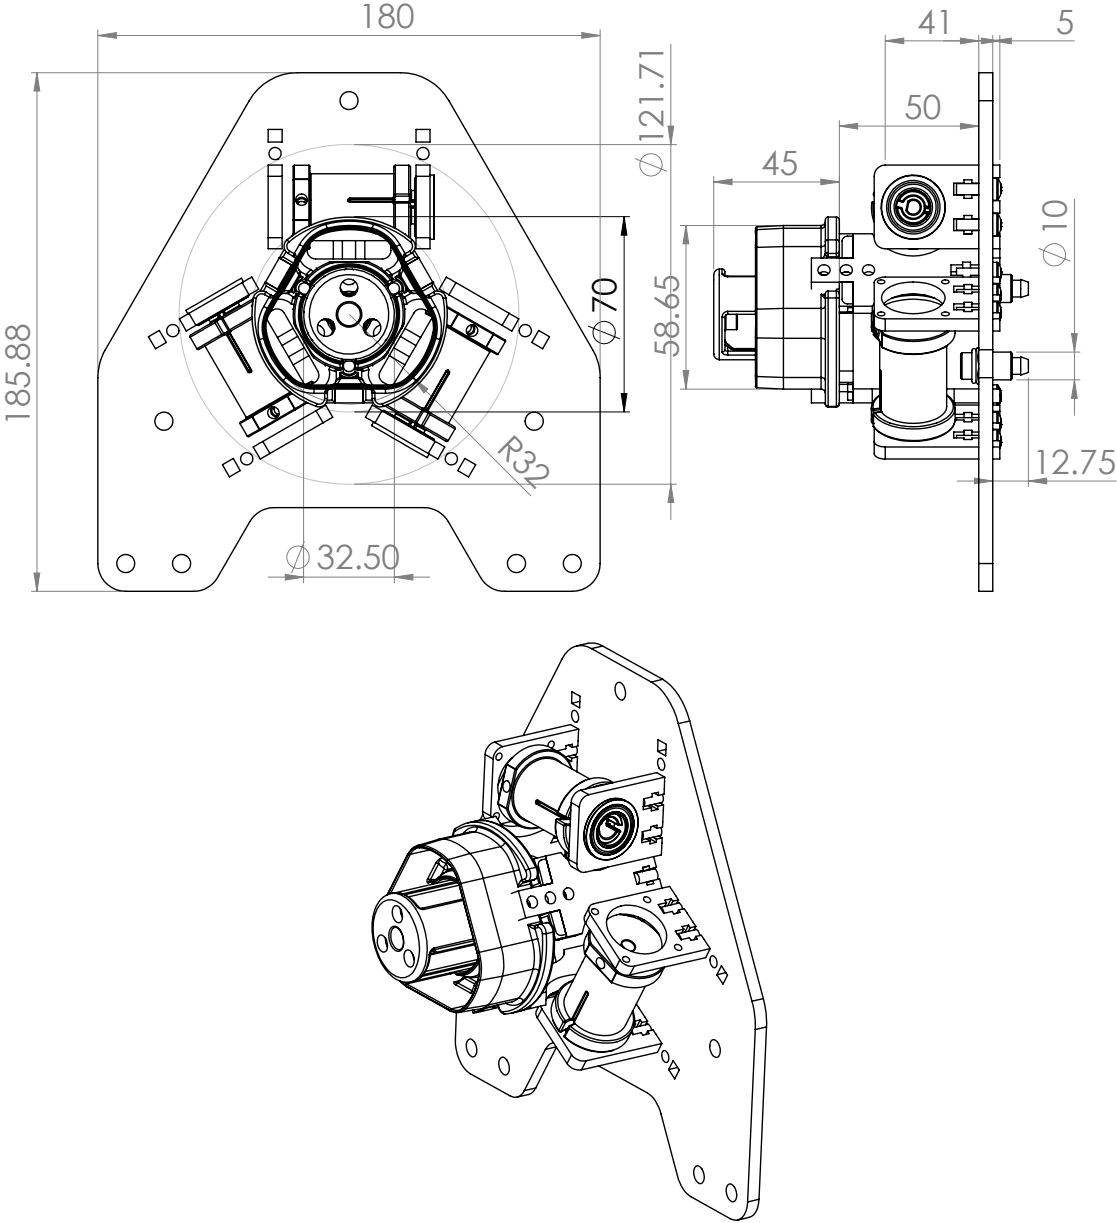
Dimensions of the assembled FU with all manufactured parts (mm).
